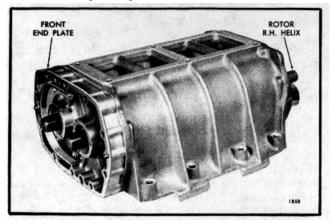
Assembling Blower Rotors into Housing and Front End Plate (Lip Type Oil Seals) using Tool J 6270-5.
